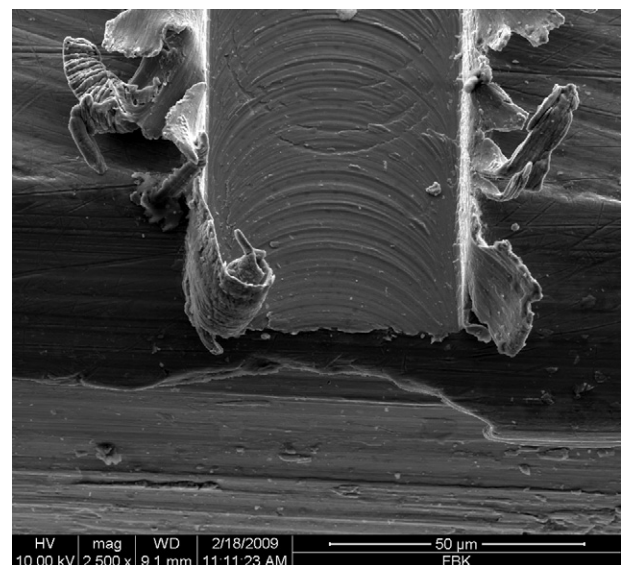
Exit burr by milling of Ti-6Al-7Nb axial depth of cut 20 µm [137].
